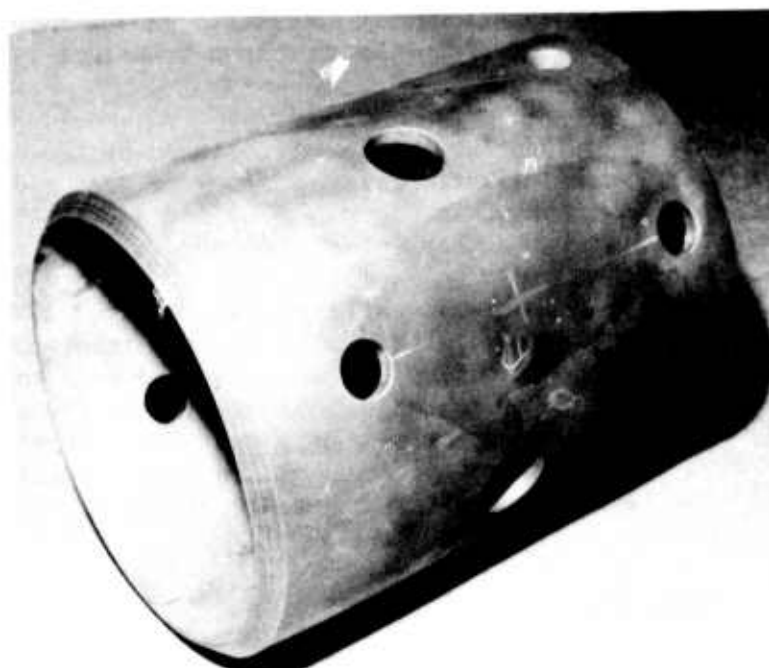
"Refel" Silicon Carbide Combustor Tube After Testing
